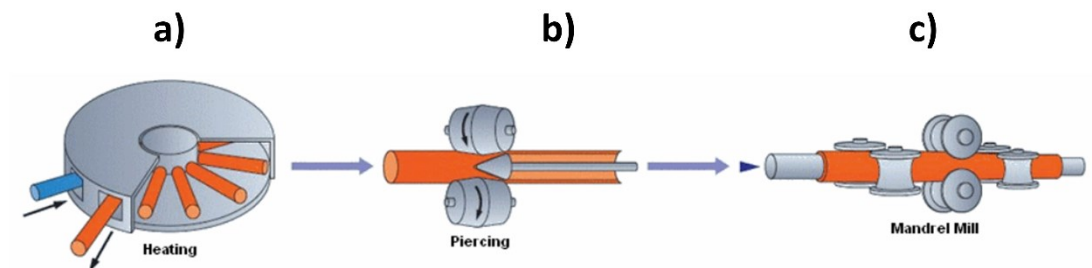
Diagrams of the first 3 steps in the rotary pierced pipe-making process (a) the rotary hearth heating furnace (b) the piercing process and (c) the mandrel milling process [97].
